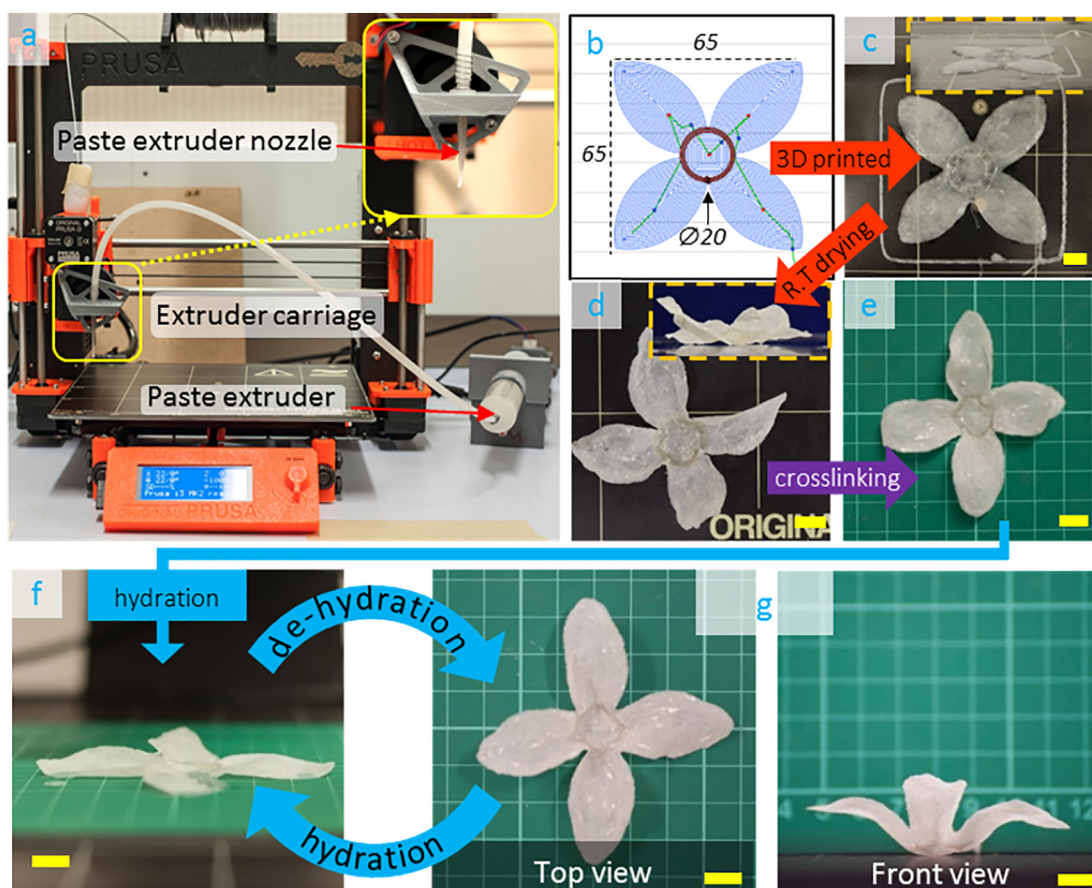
(a) 3D printer and paste extruder set up; Extruder housing is shown in insert with the nozzle for printing gel and composite materials. (b–g) Fabrication of petal architecture (b) Generated print path from CAD model – dimensions are in mm (c) 3D printed form (d) Drying at room temperature initiating morphing (e) After crosslinking to maximise and fix the 3D shape (f) Deployed to flat configuration upon hydration (g) drying (dehydration) recovers the 3D petal shape. Side views are shown in insert. (Scale bar = 10 mm).
